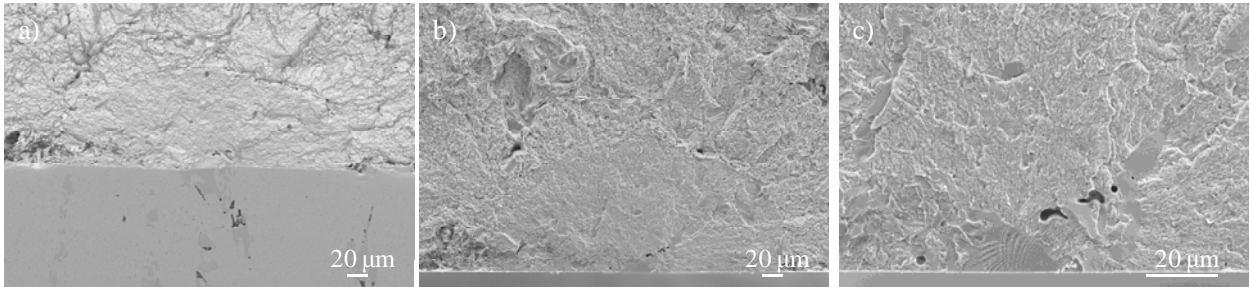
Fracture surface of the 1.2379 D2 broken monotonically after some cracks had been nucleated in fatigue. The halo of the fatigue precrack has the following dimensions: a 122 μm and $2c$ 262 μm (a/c 0,9)
